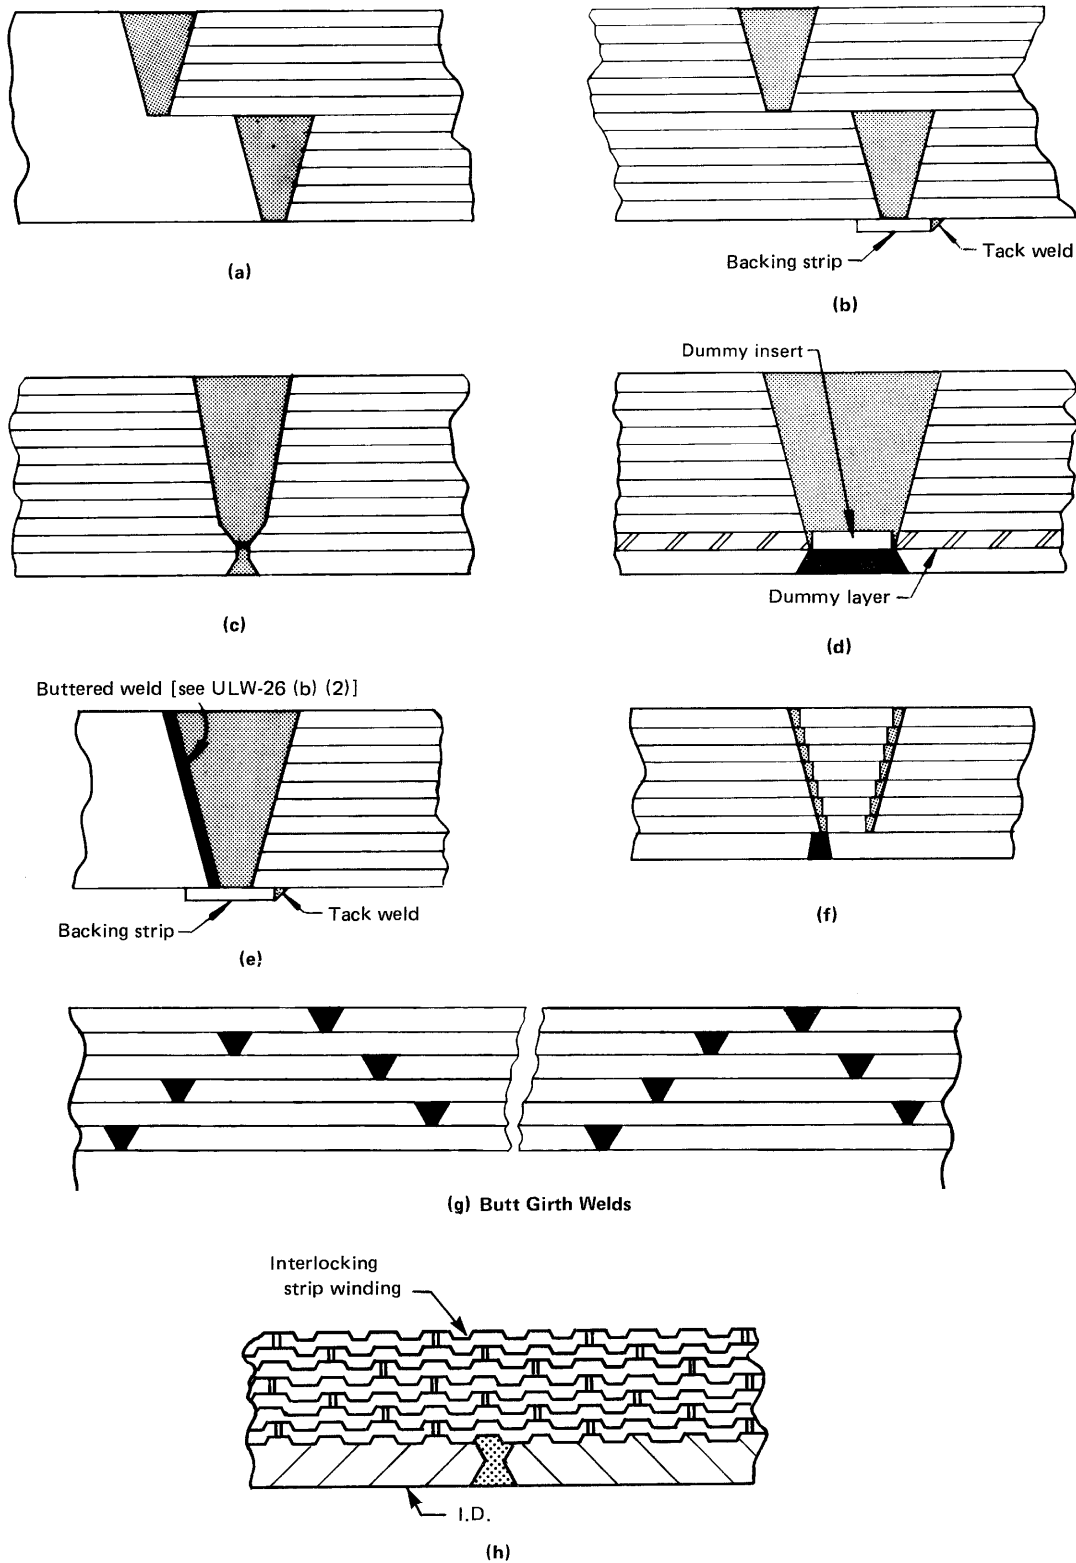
SOME ACCEPTABLE WELDED JOINTS OF LAYERED-TO-LAYERED AND LAYERED-TO-SOLID SECTIONS
